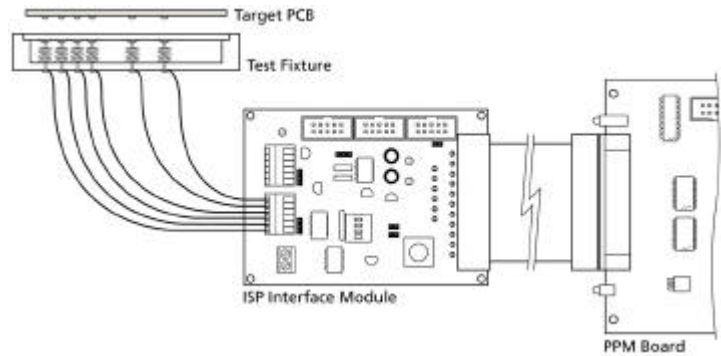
ISP Interface Module connected to a Bed-of-Nails Test Fixture via connector J5
